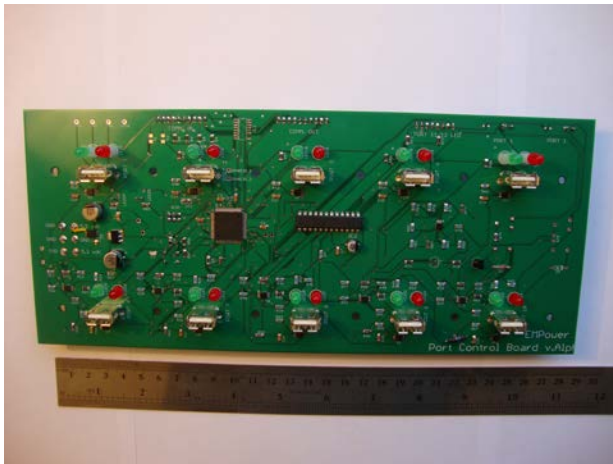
Port Control Board PCB. Measures 11.5" x 7".
